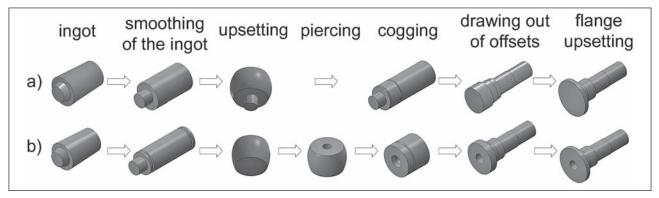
Forging technology of windmill main shaft: a) solid part, b) hollow part
